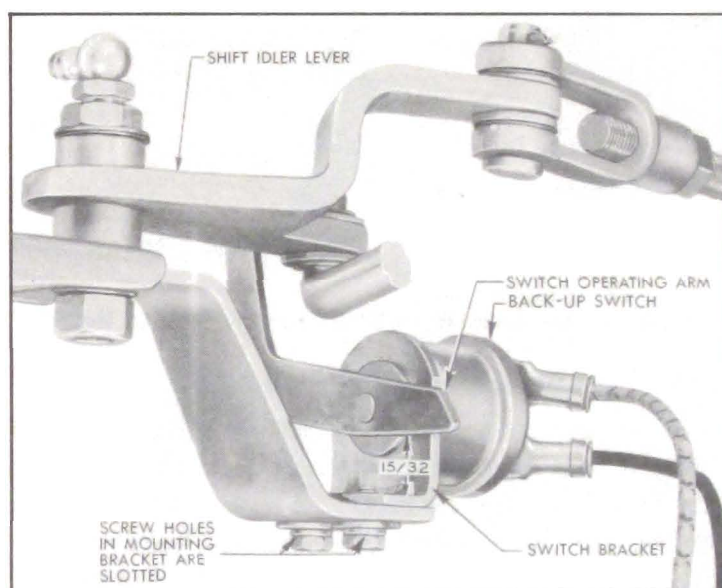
Adjustment of Back-Up Switch—Dynaflow Drive
